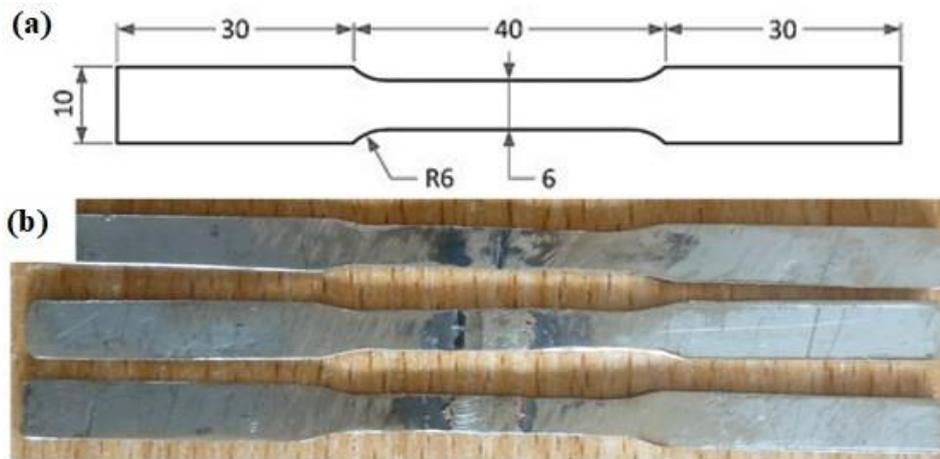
Tensile specimen (a) geometry and dimensions in millimetres, (b) fabricated samples
